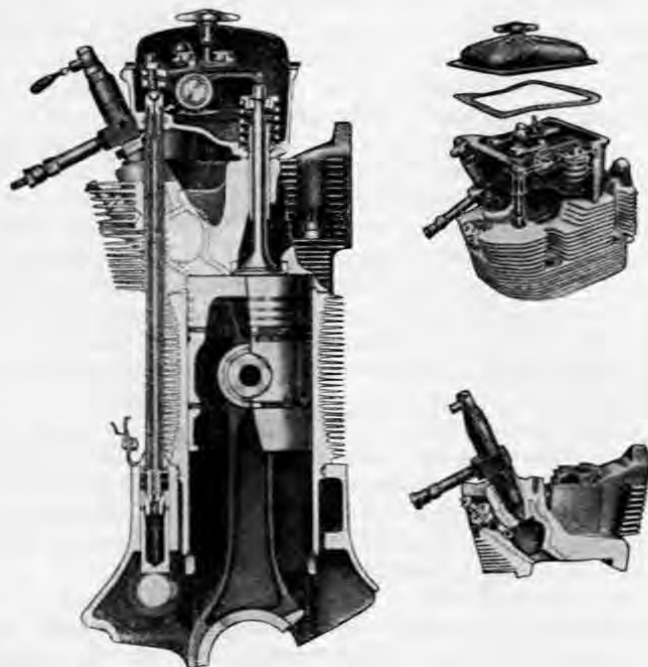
Cylinder and injection chamber of an air-cooled Deutz engine.
